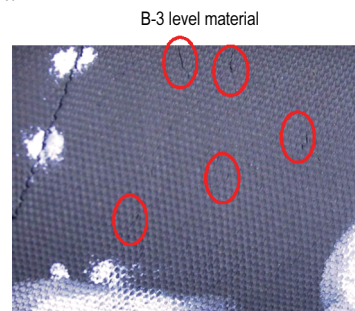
Cracks on the Hose Surface that Emerged in Outdoor Exposure Test
